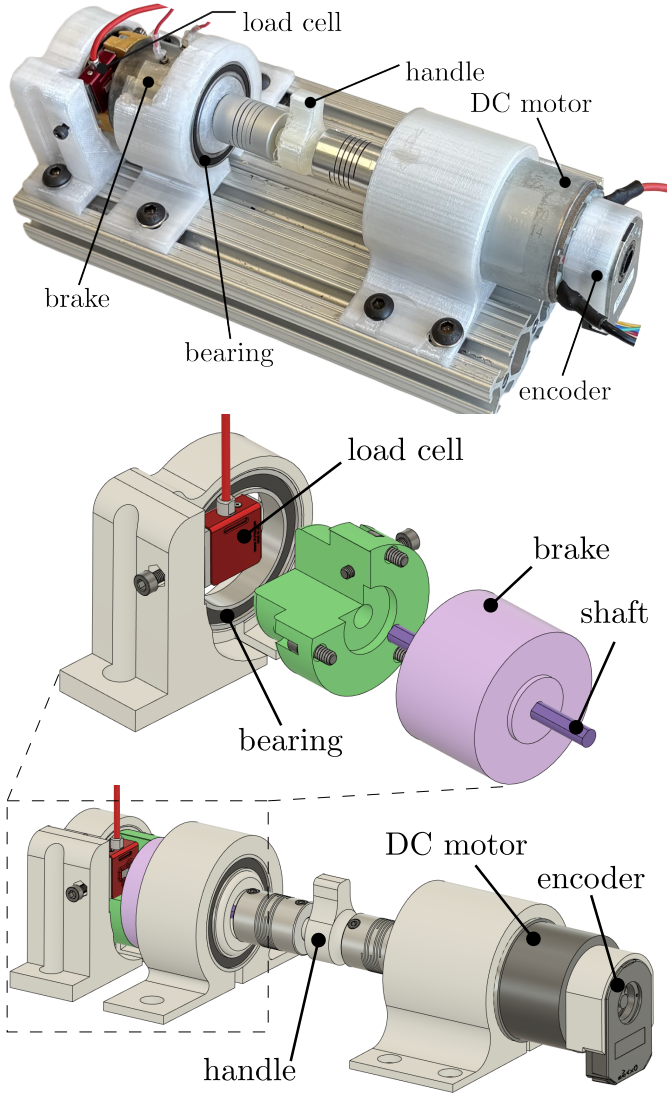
Prototype of the hybrid actuator with a brake and motor connected in parallel (top) and exploded CAD model (bottom) showing how the load cell is attached to the brake drum. A rotary encoder is connected to the back of the motor.
